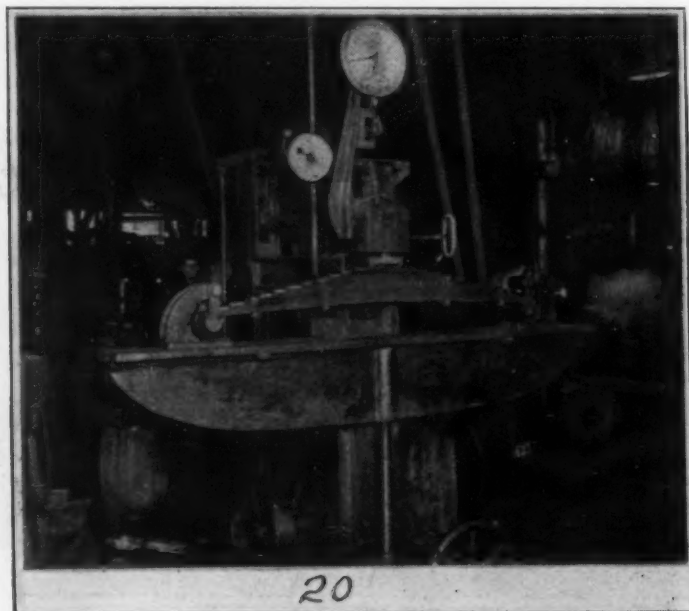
Capacity Testing Machine for Determining the Load and Deflection of Finished and Assembled Leaf Springs.
